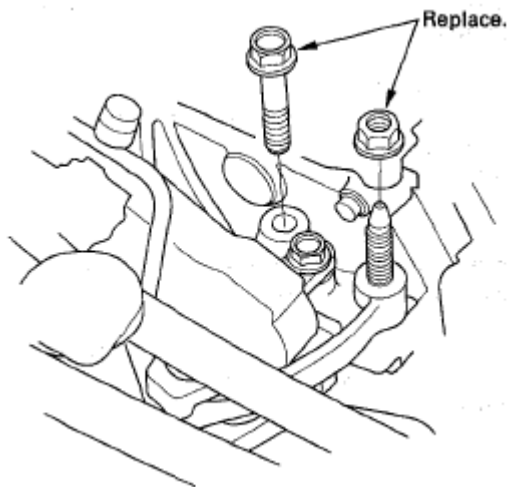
Identifying Engine Mount Bracket Mounting Bolt And Nut
